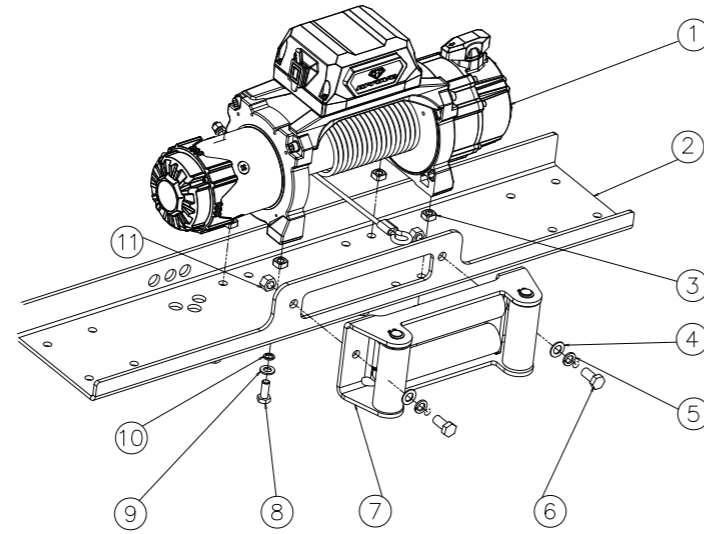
way roller fairlead and winch attachment to frame (for D9500SC / D12000SC)
